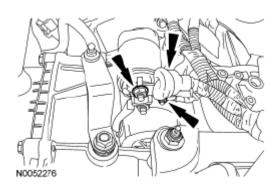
Locating Starter Cable Boot Courtesy of FORD MOTOR CO.
